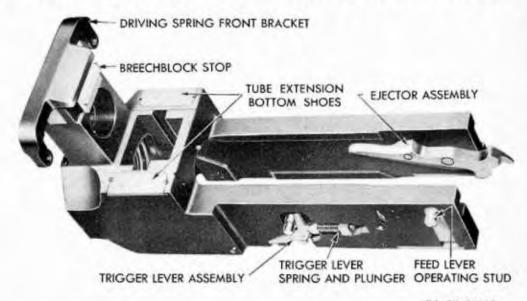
Tube Extension Assembly (Gun M10)—Left View
